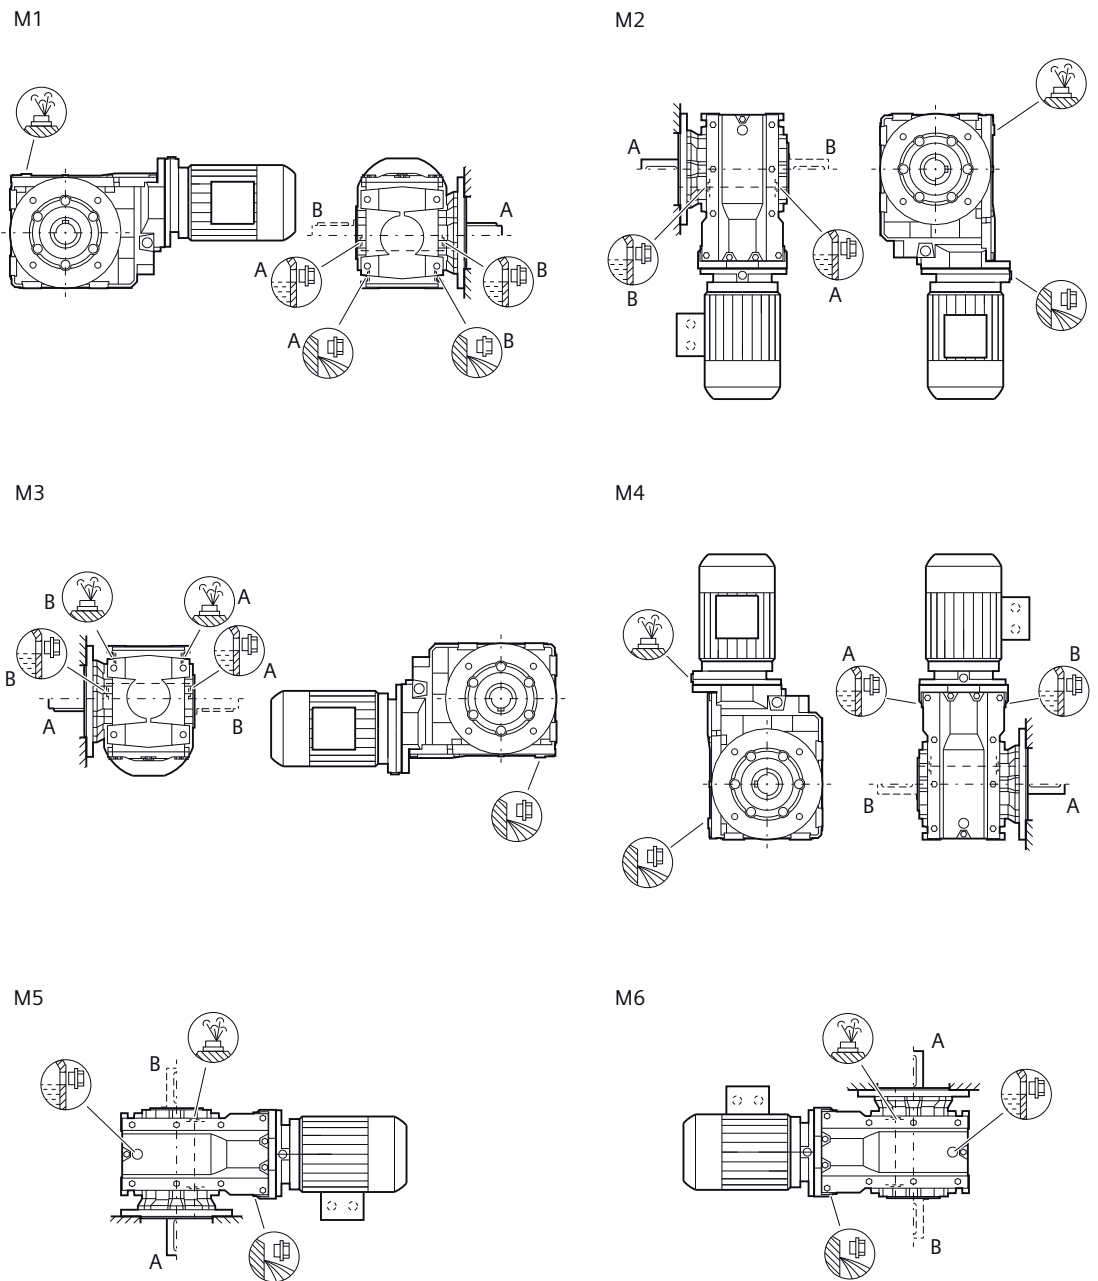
Mounting positions for bevel gearbox B.F flange-mounted design and B.Z with housing flange, sizes 39 - 49
